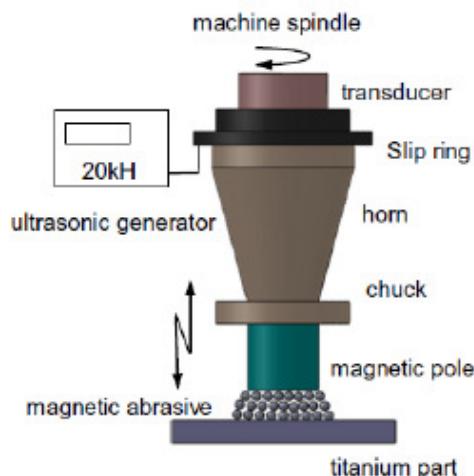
Schematization of the tool used in ultrasonic assisted magnetic abrasive finishing process.
